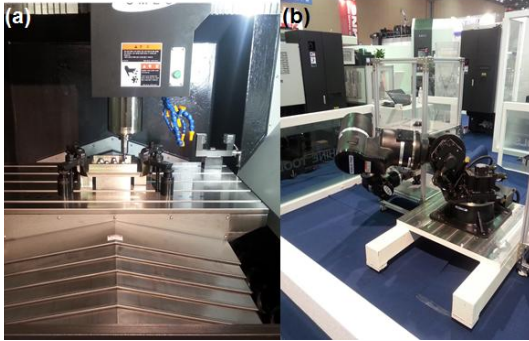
Rotary example (a) spindle of machine tool (b) robot arm
